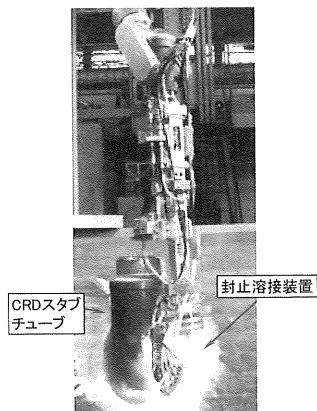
Seal welding machine for CRD Stub-tube
